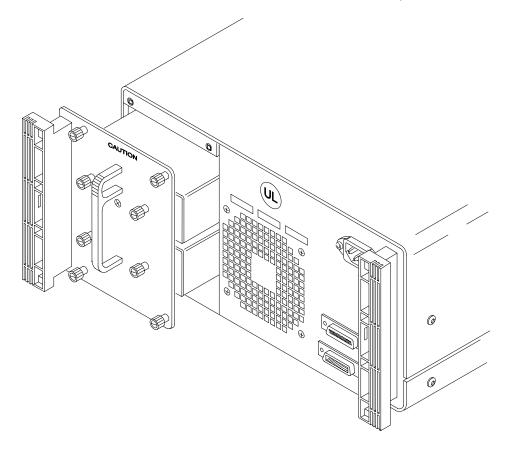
Removing the Back-Panel Assembly and Plug-In Optical Module(s)
